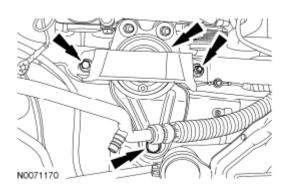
Locating Stud Bolt, Engine Mount And Bolts Courtesy of FORD MOTOR CO.
